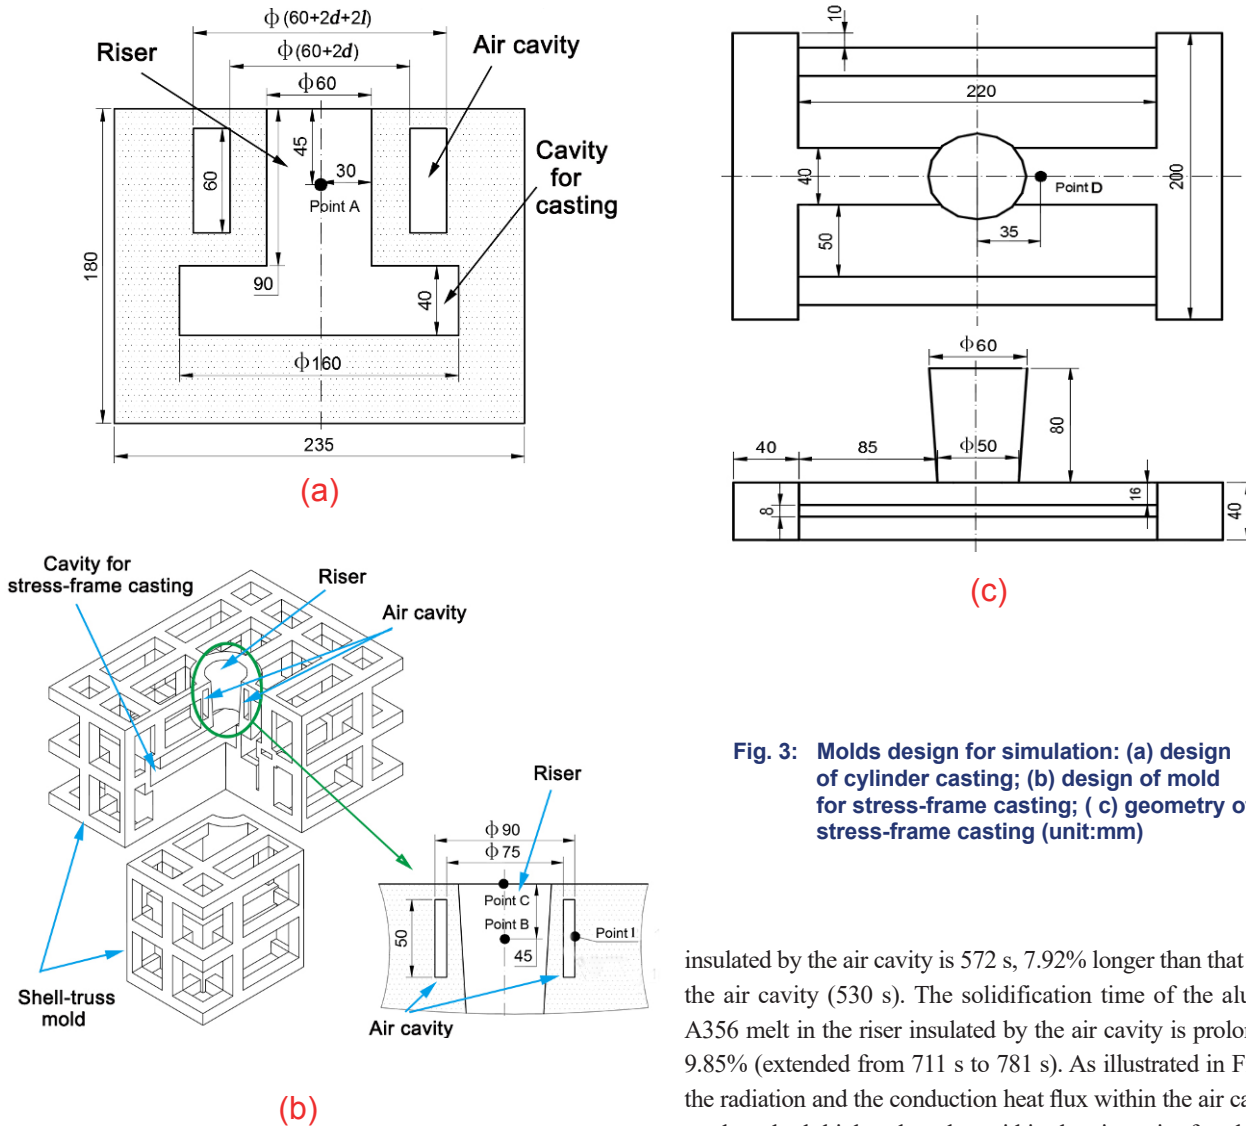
Molds design for simulation: (a) design of cylinder casting; (b) design of mold for stress-frame casting; (c) geometry of stress-frame casting (unit:mm)
